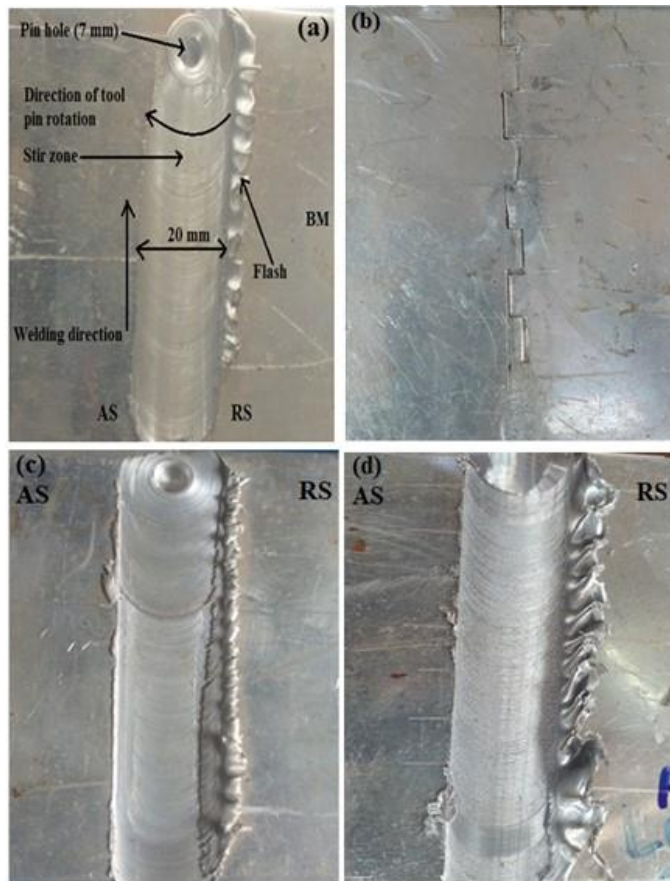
Surface appearances of IFSW welds: (a) front view of the single-sided IFSW weld (b) Back view of the single-side weld (c) front view of the double-sided IFSW weld (d) Back view of double-sided IFSW weld.
